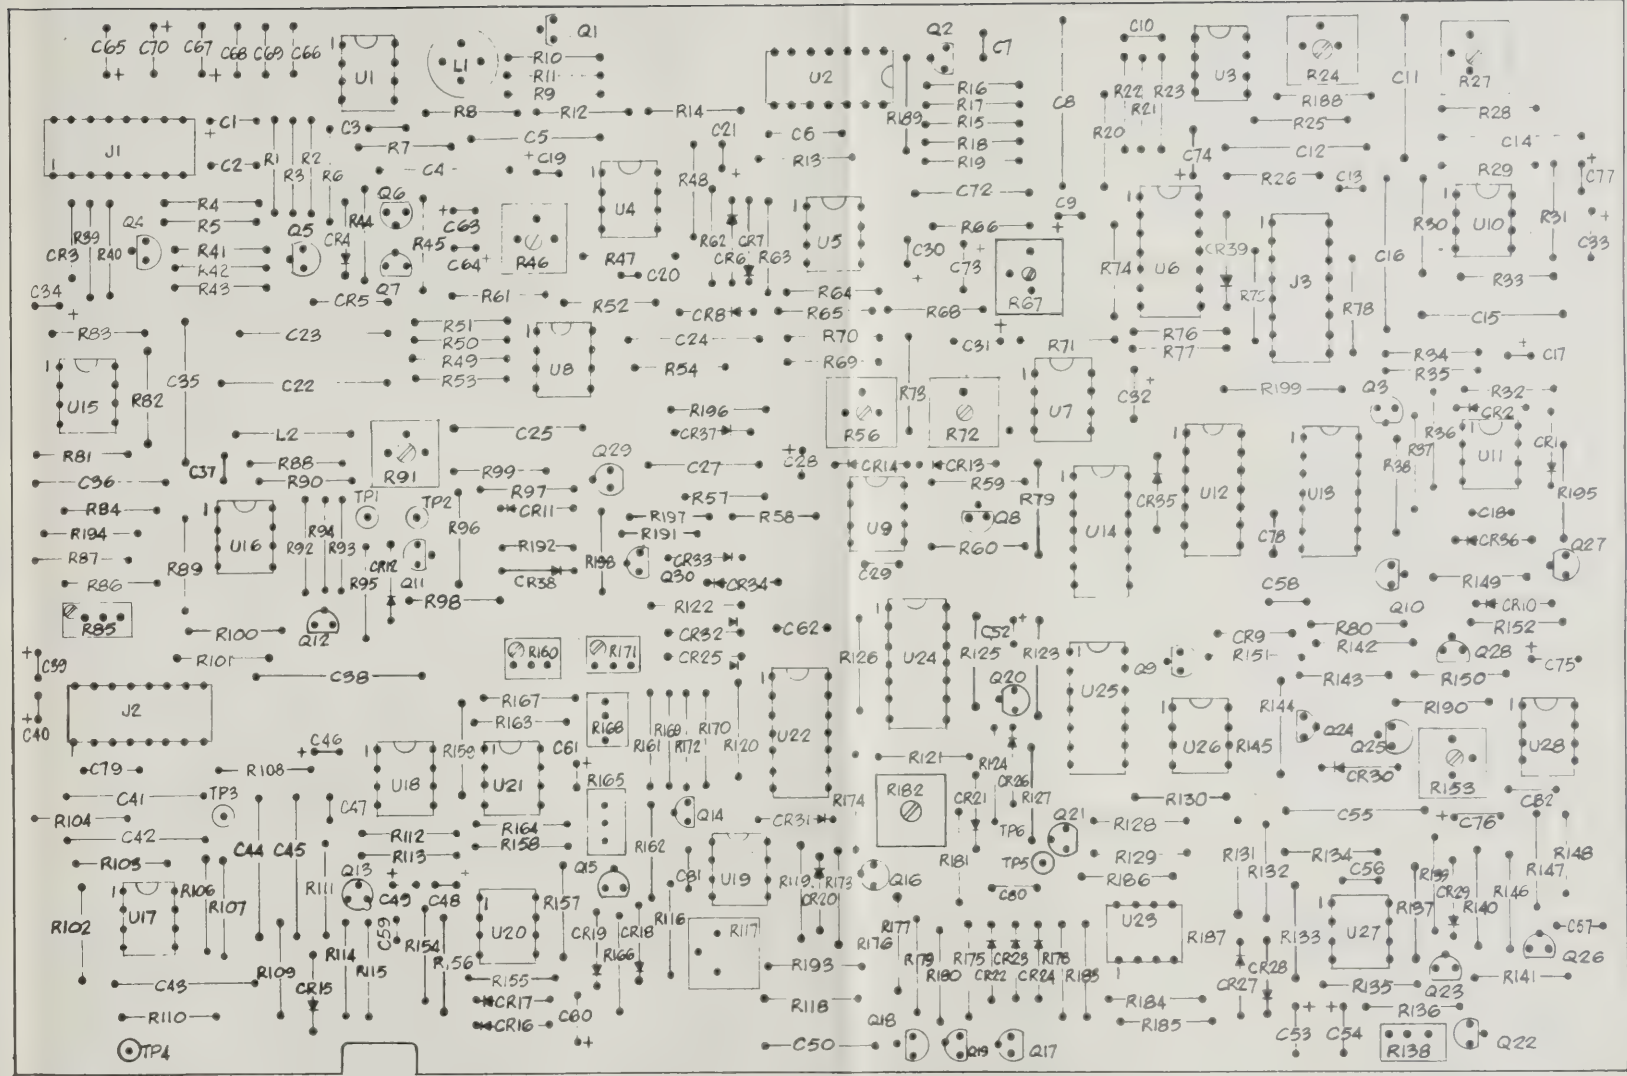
A2, Computer/Converter Assembly, Parts Location Diagram
